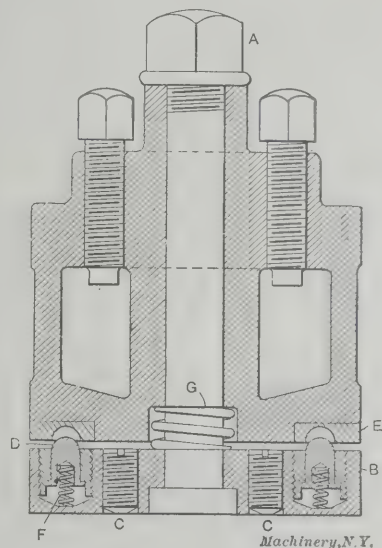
Sectional View of the Brewer Multiple Tool-holder
